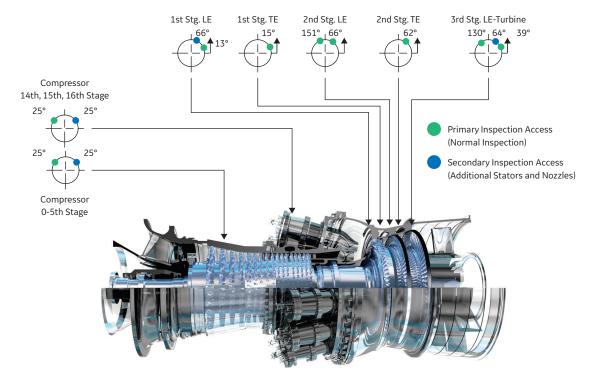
Borescope inspection access locations for 7F.03, 7F.04,7FB.01, 9F.03, 9F.05
